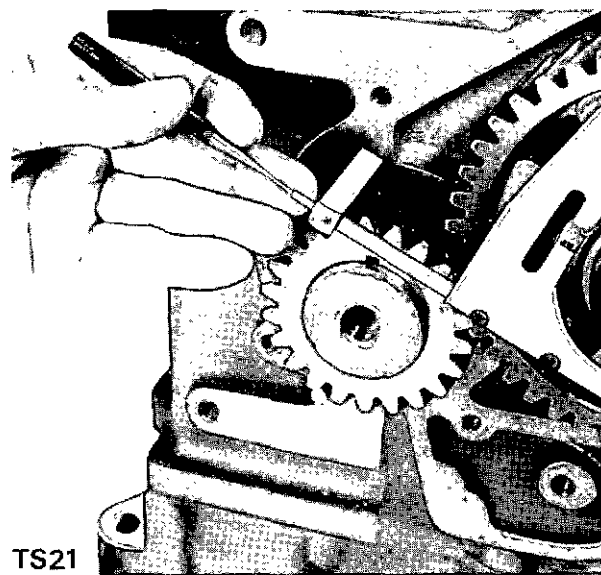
Governor Lever Fully Assembled (variable speed engine)
